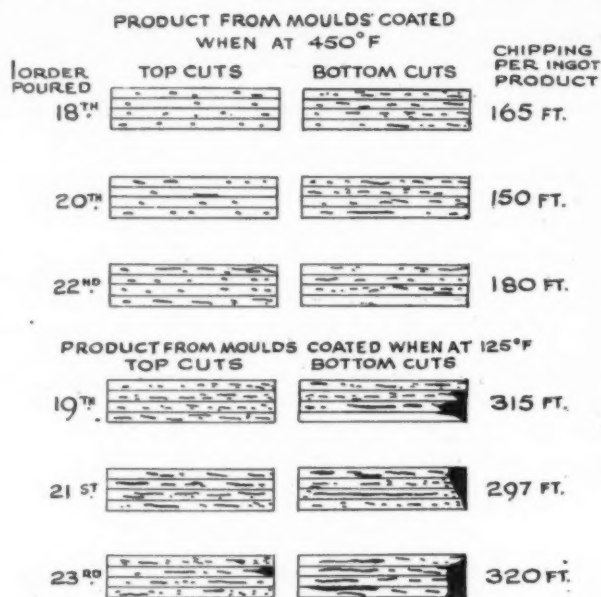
Typical billet surfaces produced from moulds which were at 450° F. and 125° F. when coated with tar. All billets from same heat of fine-grained steel.
